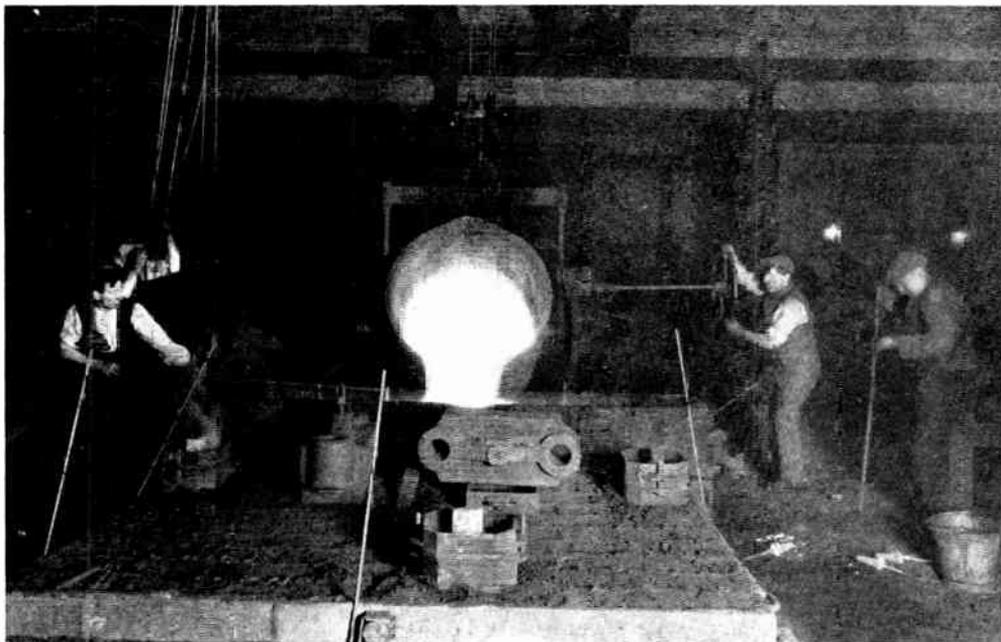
POURING A LARGE NOMAG CASTING. (*Ferranti, Ltd.*)
